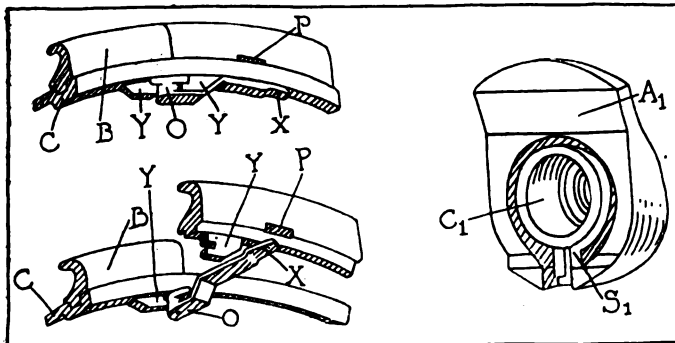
Showing the construction of the ring when locked and unlocked. Fig. 10—End view of clamp
